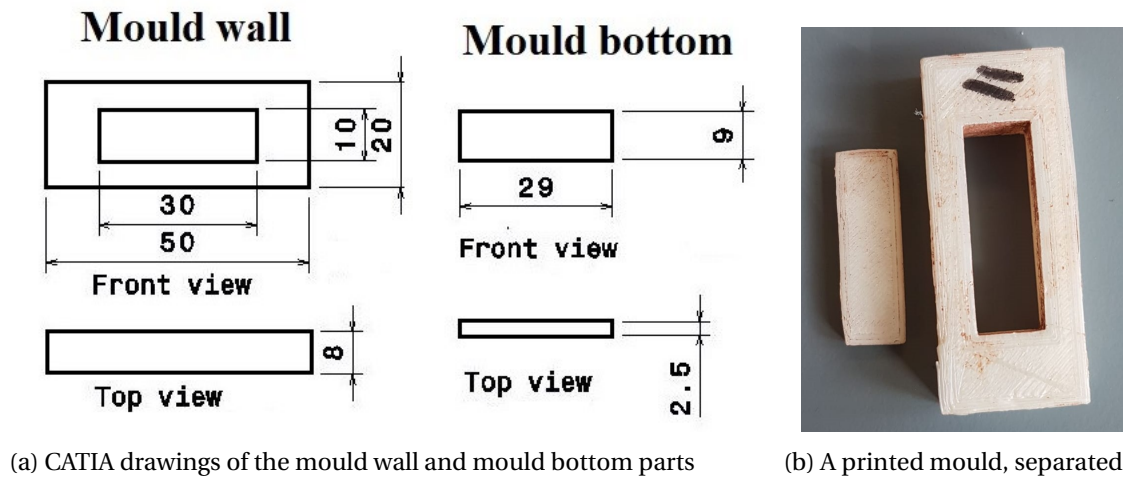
The appearance of a mould in the drawn form and the printed form
